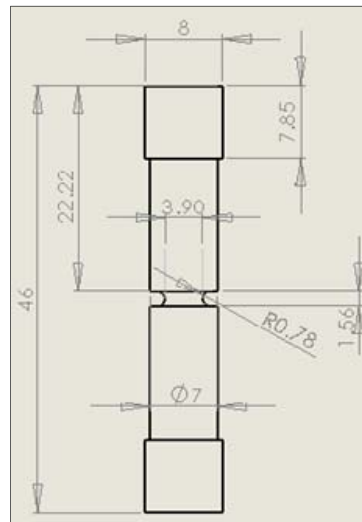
A schematic showing the dimensions of the sharp notched bar samples that were machined from 8 mm diameter cylinders.
